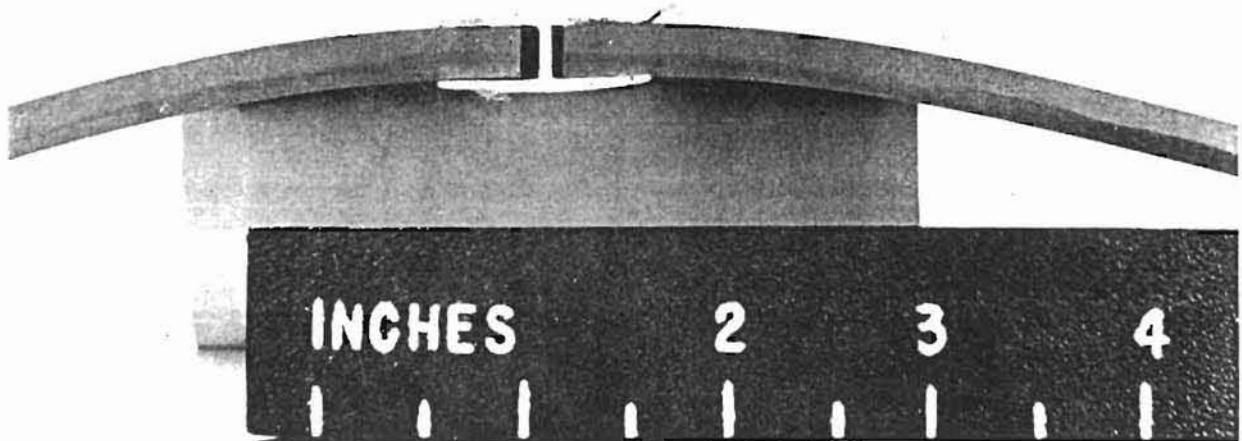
End view of H cross-section fastener with abating material inserted.
